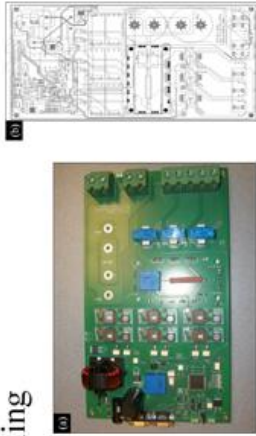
(a) This photograph shows the motor drive board under development. (b) shows the PCB layout. This PCB is a 4 layer board with 4 or copper on each layer. This circuit was designed/constructed by former student Christopher C. Arnold
